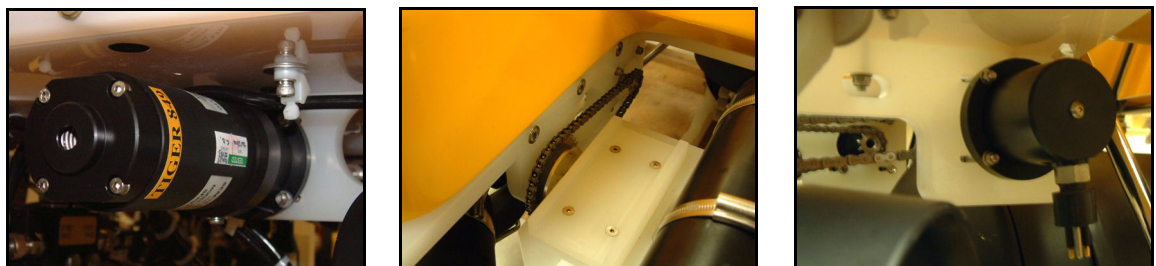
Tilt Motor, Platform and Follow-up Assemblies
